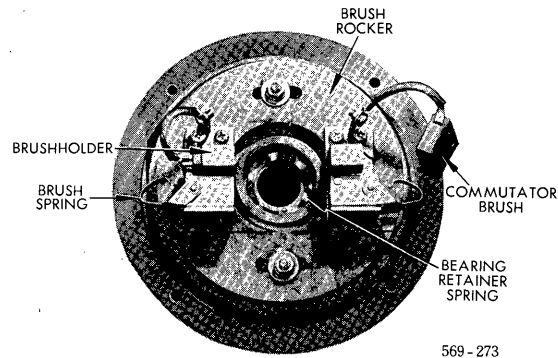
OPP.-DRIVE-END BRACKET of Type UGMMKR-2AAA1
